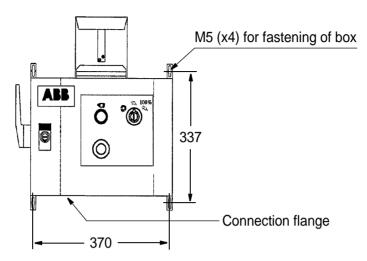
Operator's panel mounted in a box (all dimensions in mm).
